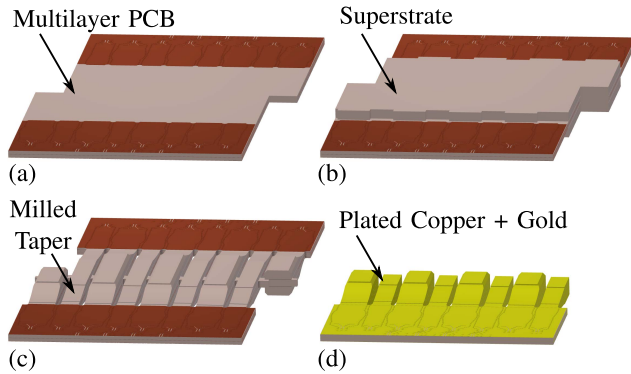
Manufacturing steps of a submodule. (a) Multilayer PCB with (b) superstrates bonded, (c) SIW tapers milled, and (d) final metalization.
